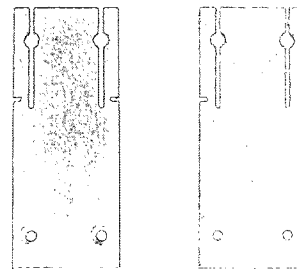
Main aluminum parts of the THMB device once cut-out from their respective fixture plates.
